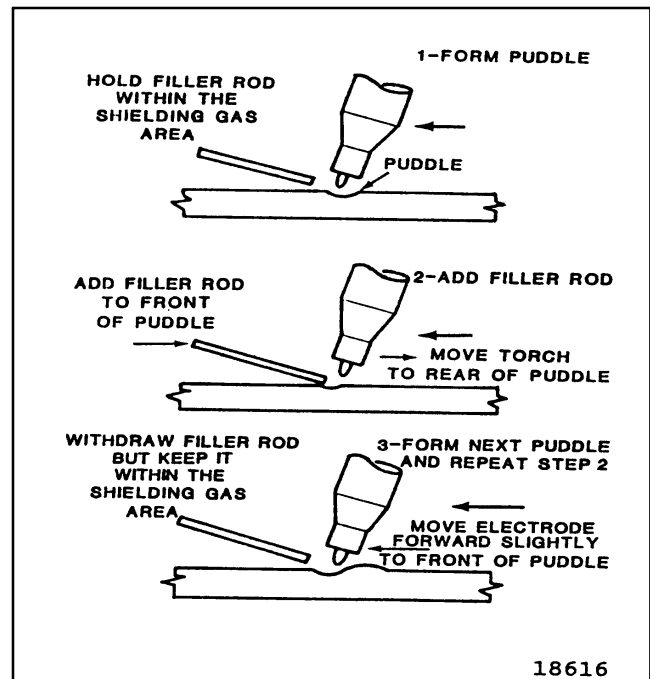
Steps Required to Add Filler Metal During GTAW
